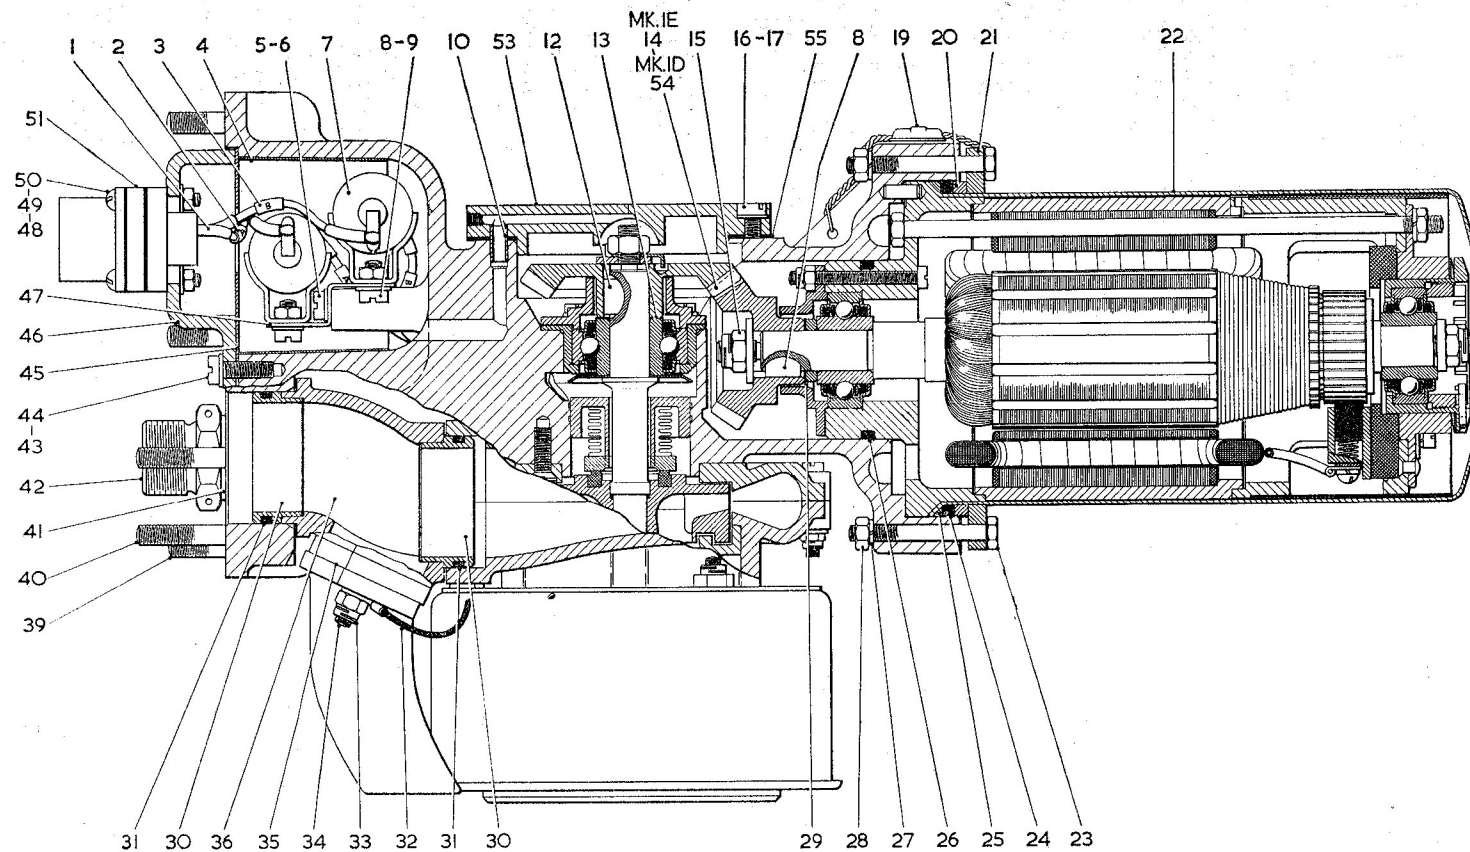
Sectional view of pump/motor assembly (SPE. 404 Mk. 1D and 1E)
